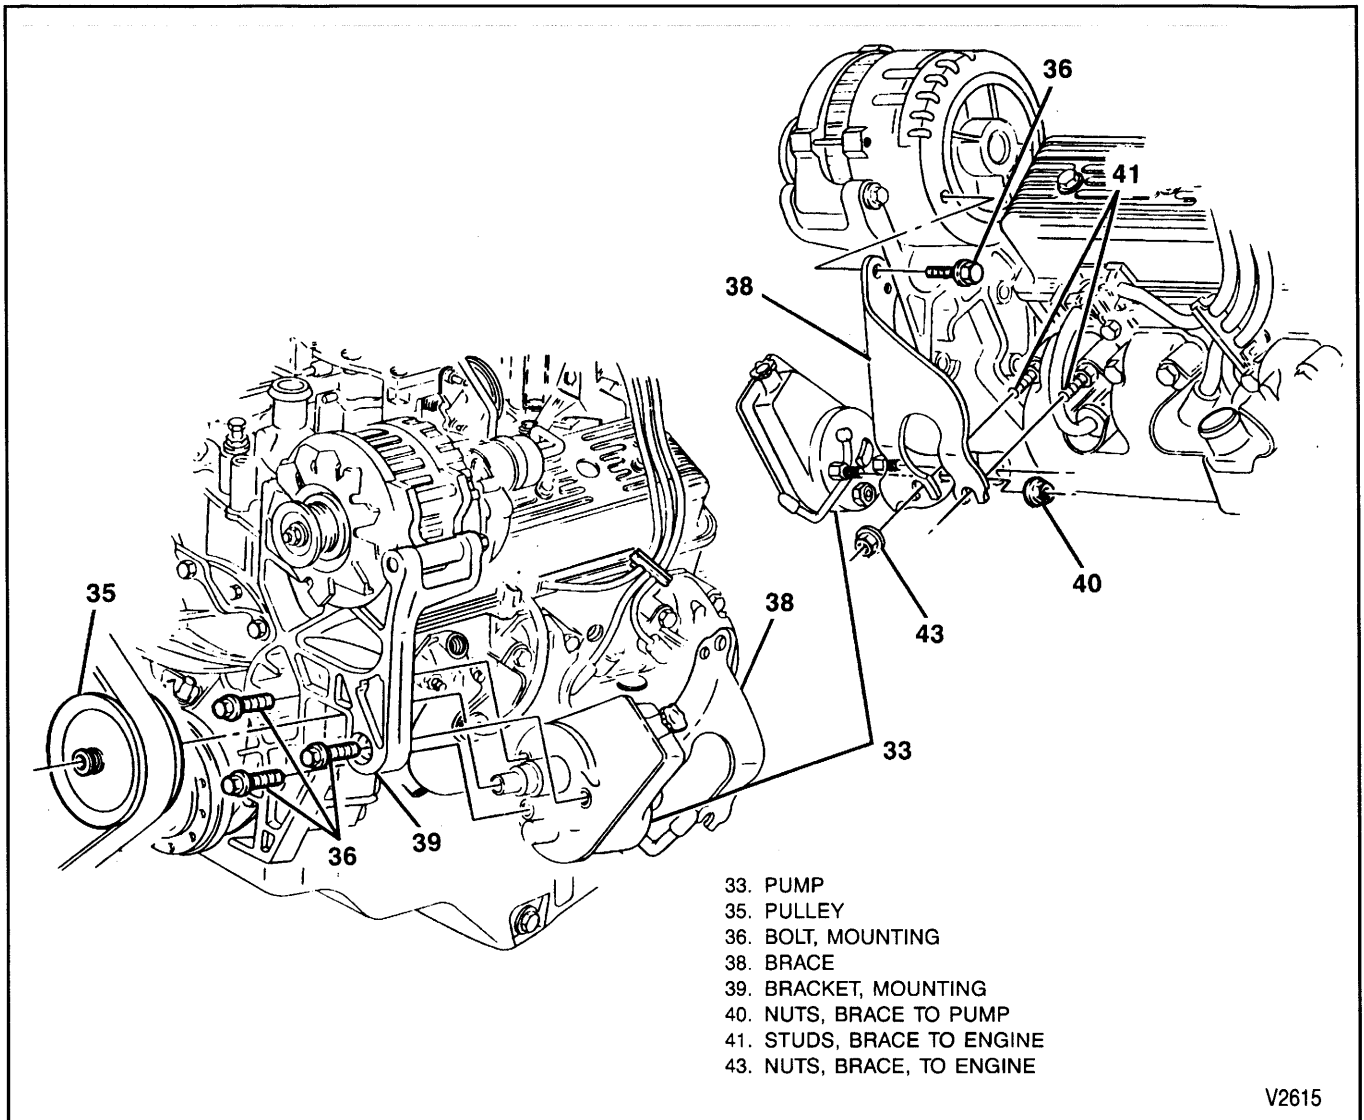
Power Steering Pump Mounting (4.3L, 5.0L, 5.7L Engines)
